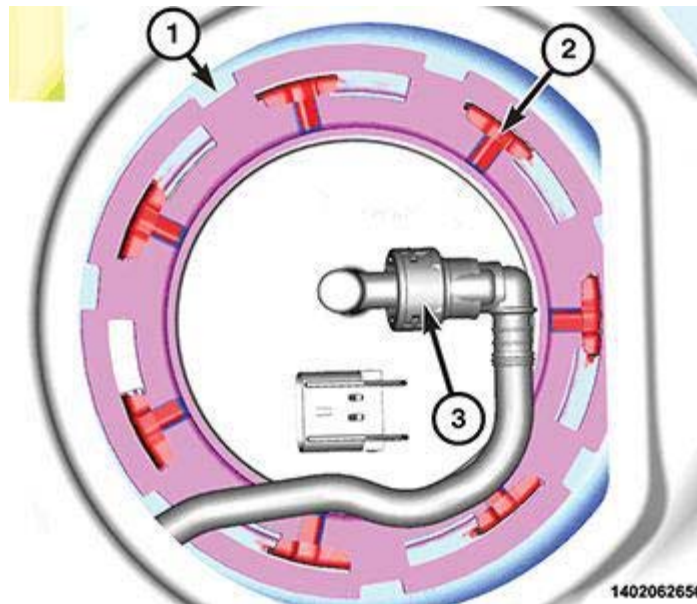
Lock Ring, Fuel Pump & Fuel Supply Line
